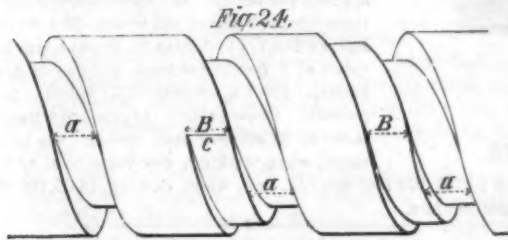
represents a thread or screw during the above described process of cutting. *a a a* is the groove or space taken out by the cuts before the tool was moved; *B B* represents the first cut taken after it was moved; *c* is the point to which the cut, *B*, is supposed (for the purpose of this illustration) to have traveled.
